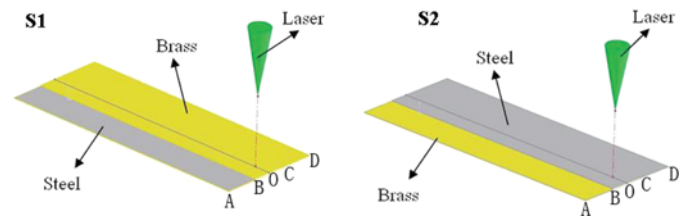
The overlap configurations used to form the welded joints.
